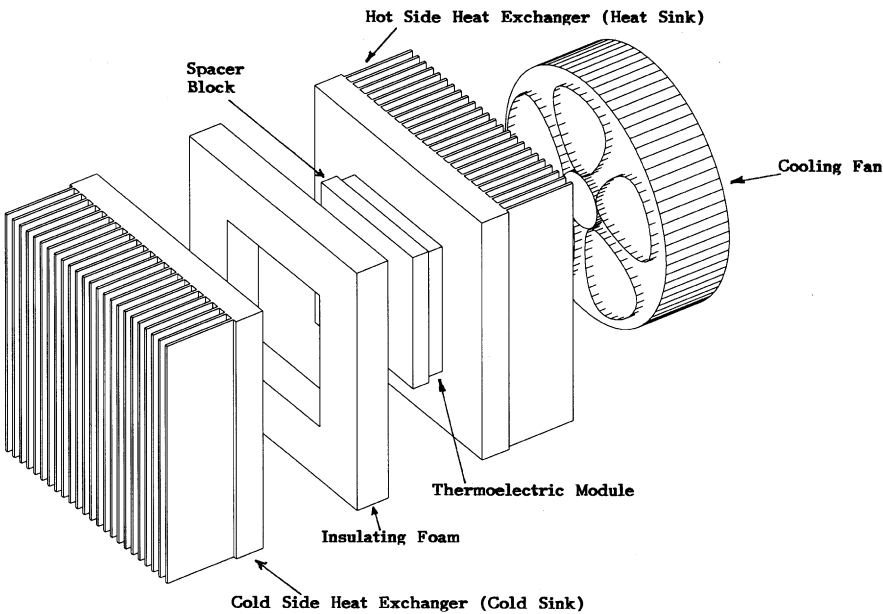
Typical isometric exploded view of thermoelectric cooler assembly.
